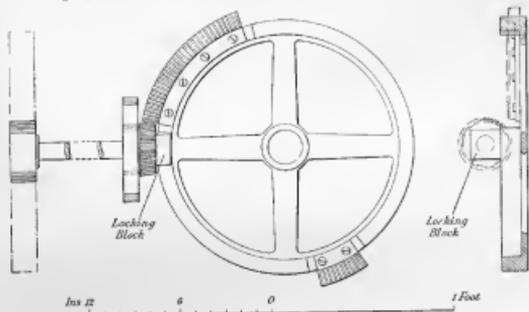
Linotype; interrupted-revolution driving-gear of mould-wheel.
